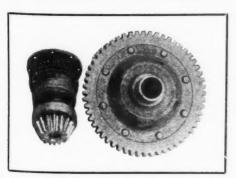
The bevel pinion which drives the reverse bevel gears and the bull gear which contains the differential
